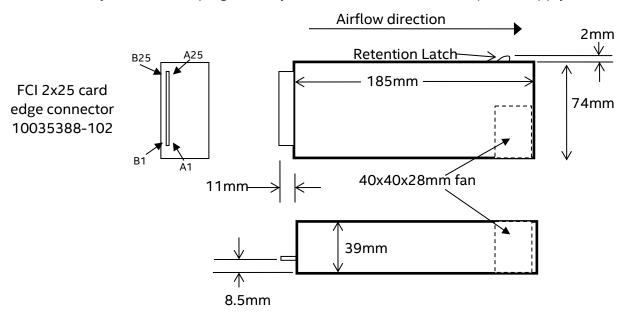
750W AC Power Supply Module Mechanical Drawing
